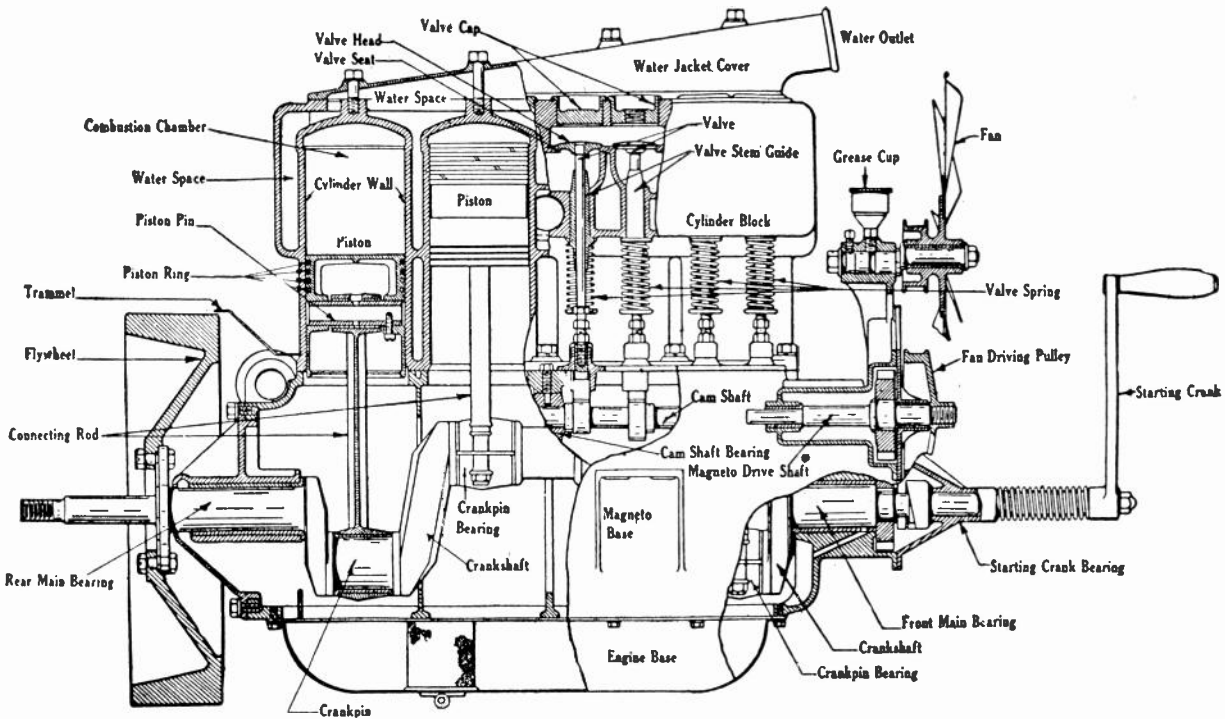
This diagram shows a sectional view and a number of the important parts of a heavy-duty four-cylinder engine. Note the names by which each of these parts are called. Also note the water jacket around the cylinders for cooling them and carrying away the heat developed by combustion.
